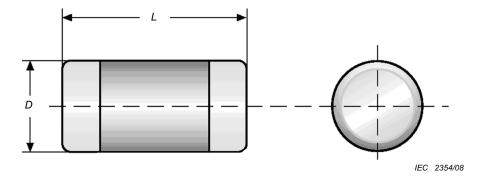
Shape and dimensions of cylindrical (RC) resistors
